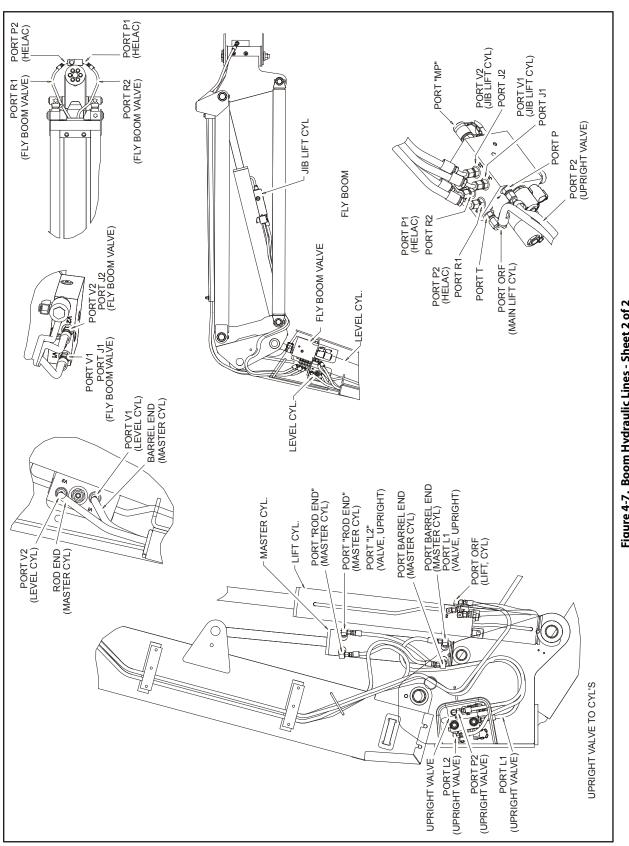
Boom Hydraulic Lines - Sheet 2 of 2
